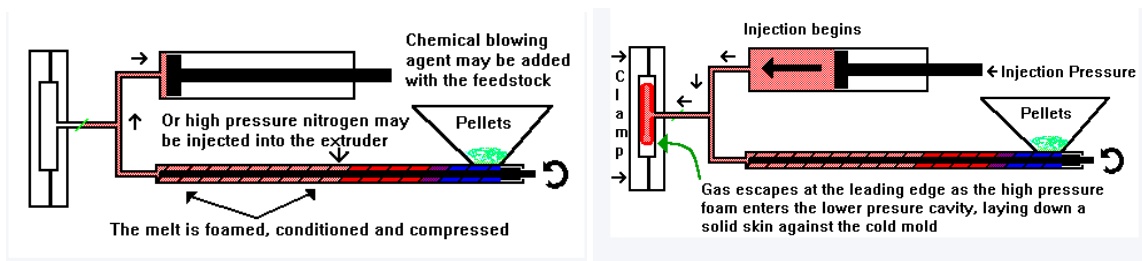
Foam Injection Moulding Process, Courtesy of (Cad)
